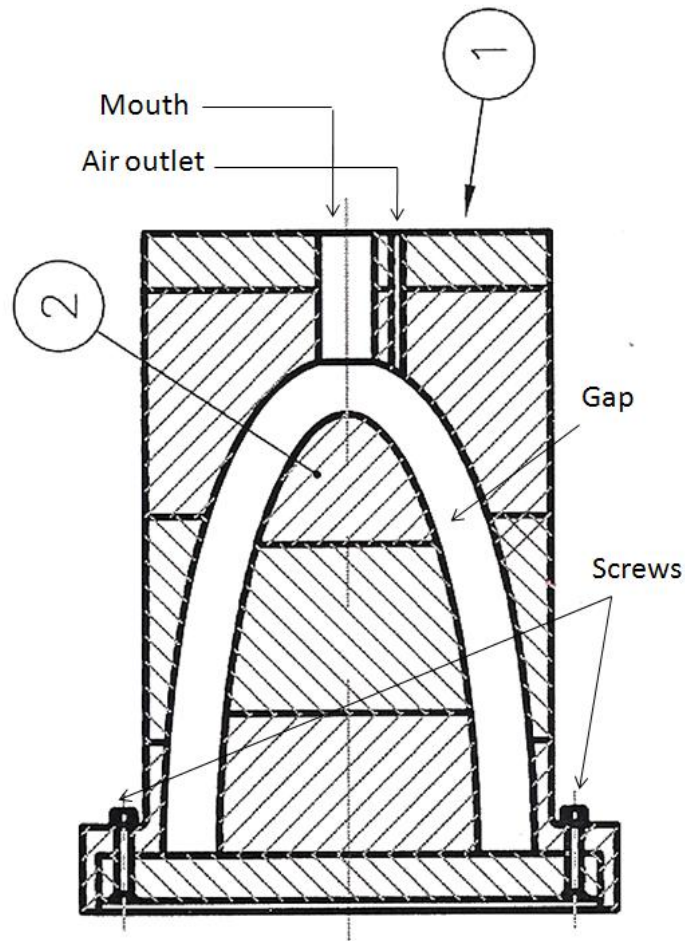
Blueprint of the cross section of two mould pieces: 1 is the outer piece and 2 is the inner piece. They are screwed together.
